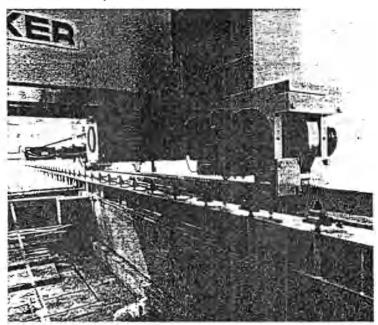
Guide rail, wheel with motor and gear reducer, measuring wheel with encoder
